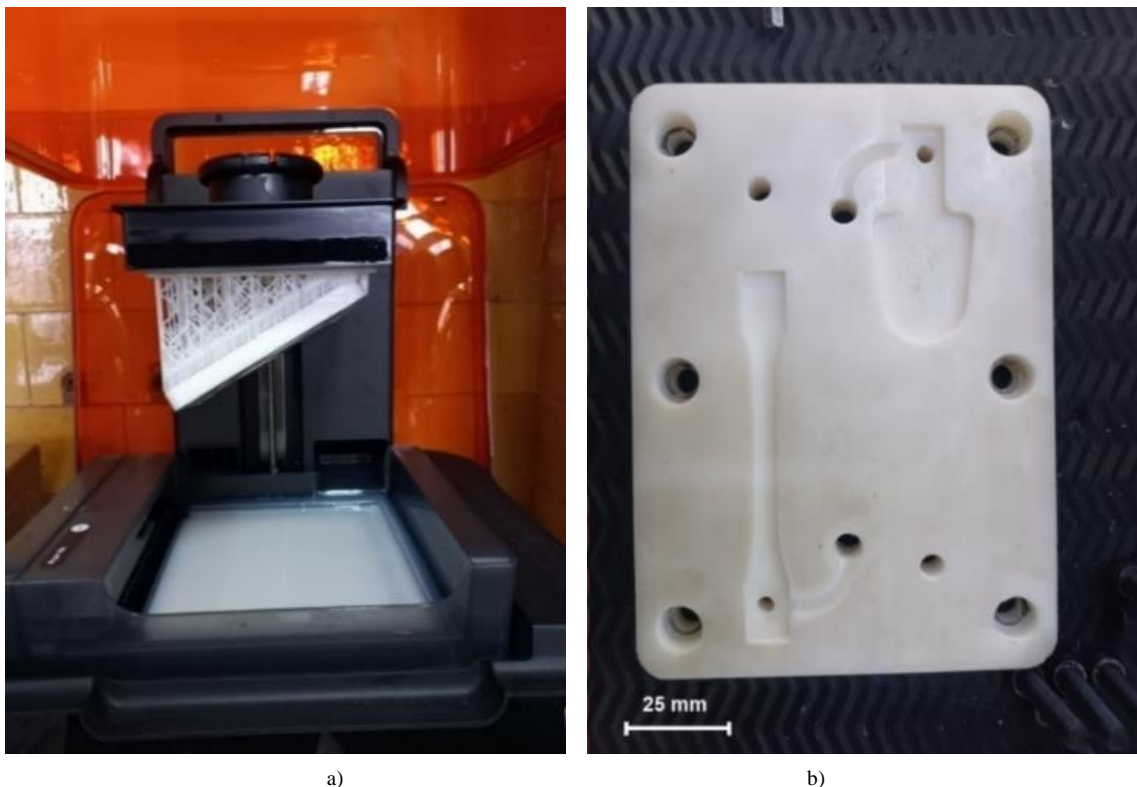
SLA molding insert made from Rigid 10k: a) during printing; b) after removing the support structure
